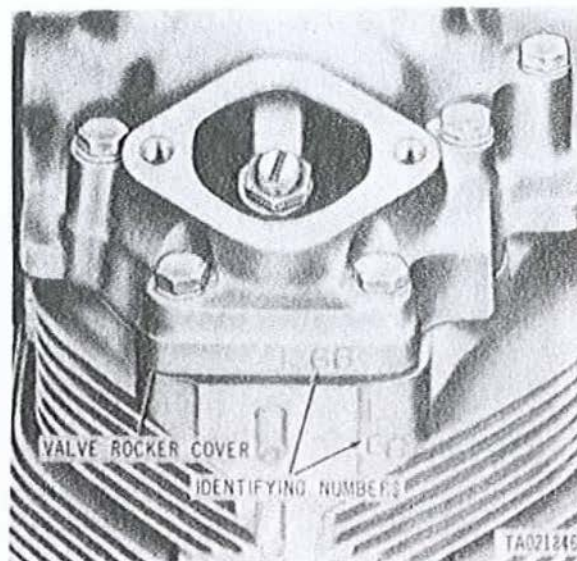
Location of valve rocker arm cover cylinder identifying marks.
